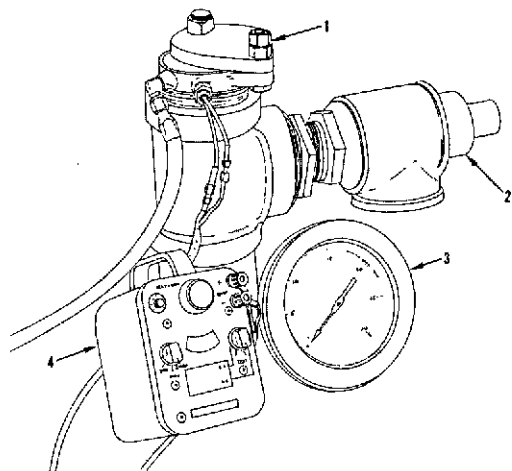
, N11834. Pressure adapter tool (with gauges) mounted to vehicle
